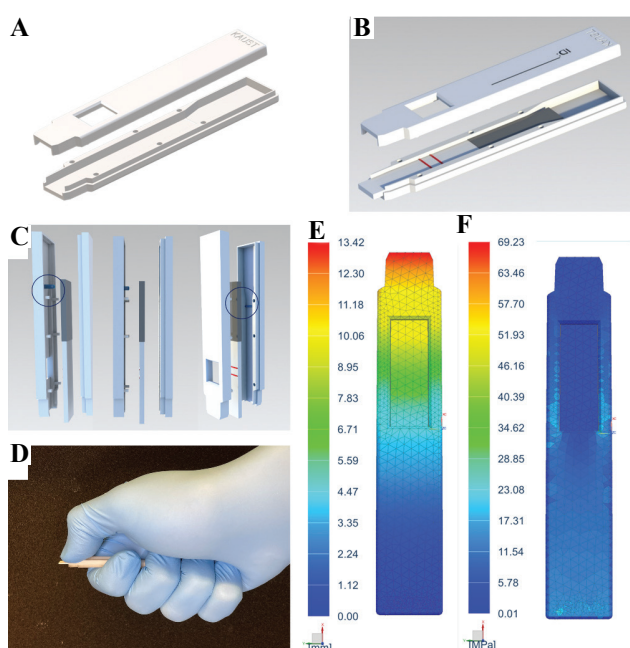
(A and B) CAD of the dipstick housing unit design. (C) CAD of the housing unit design with the bed pressing locking mechanism for securing the bed, the dipstick housing unit was 3D printed using vat photopolymerization. (D) The assumption and location of the applied force used in the simulation. (E) Simulation of the displacement for the dipstick cassette measured in mm when 5 N force was applied. (F) Simulation of the von Mises stress measured in MPa on the dipstick cassette when 5 N force was applied.
